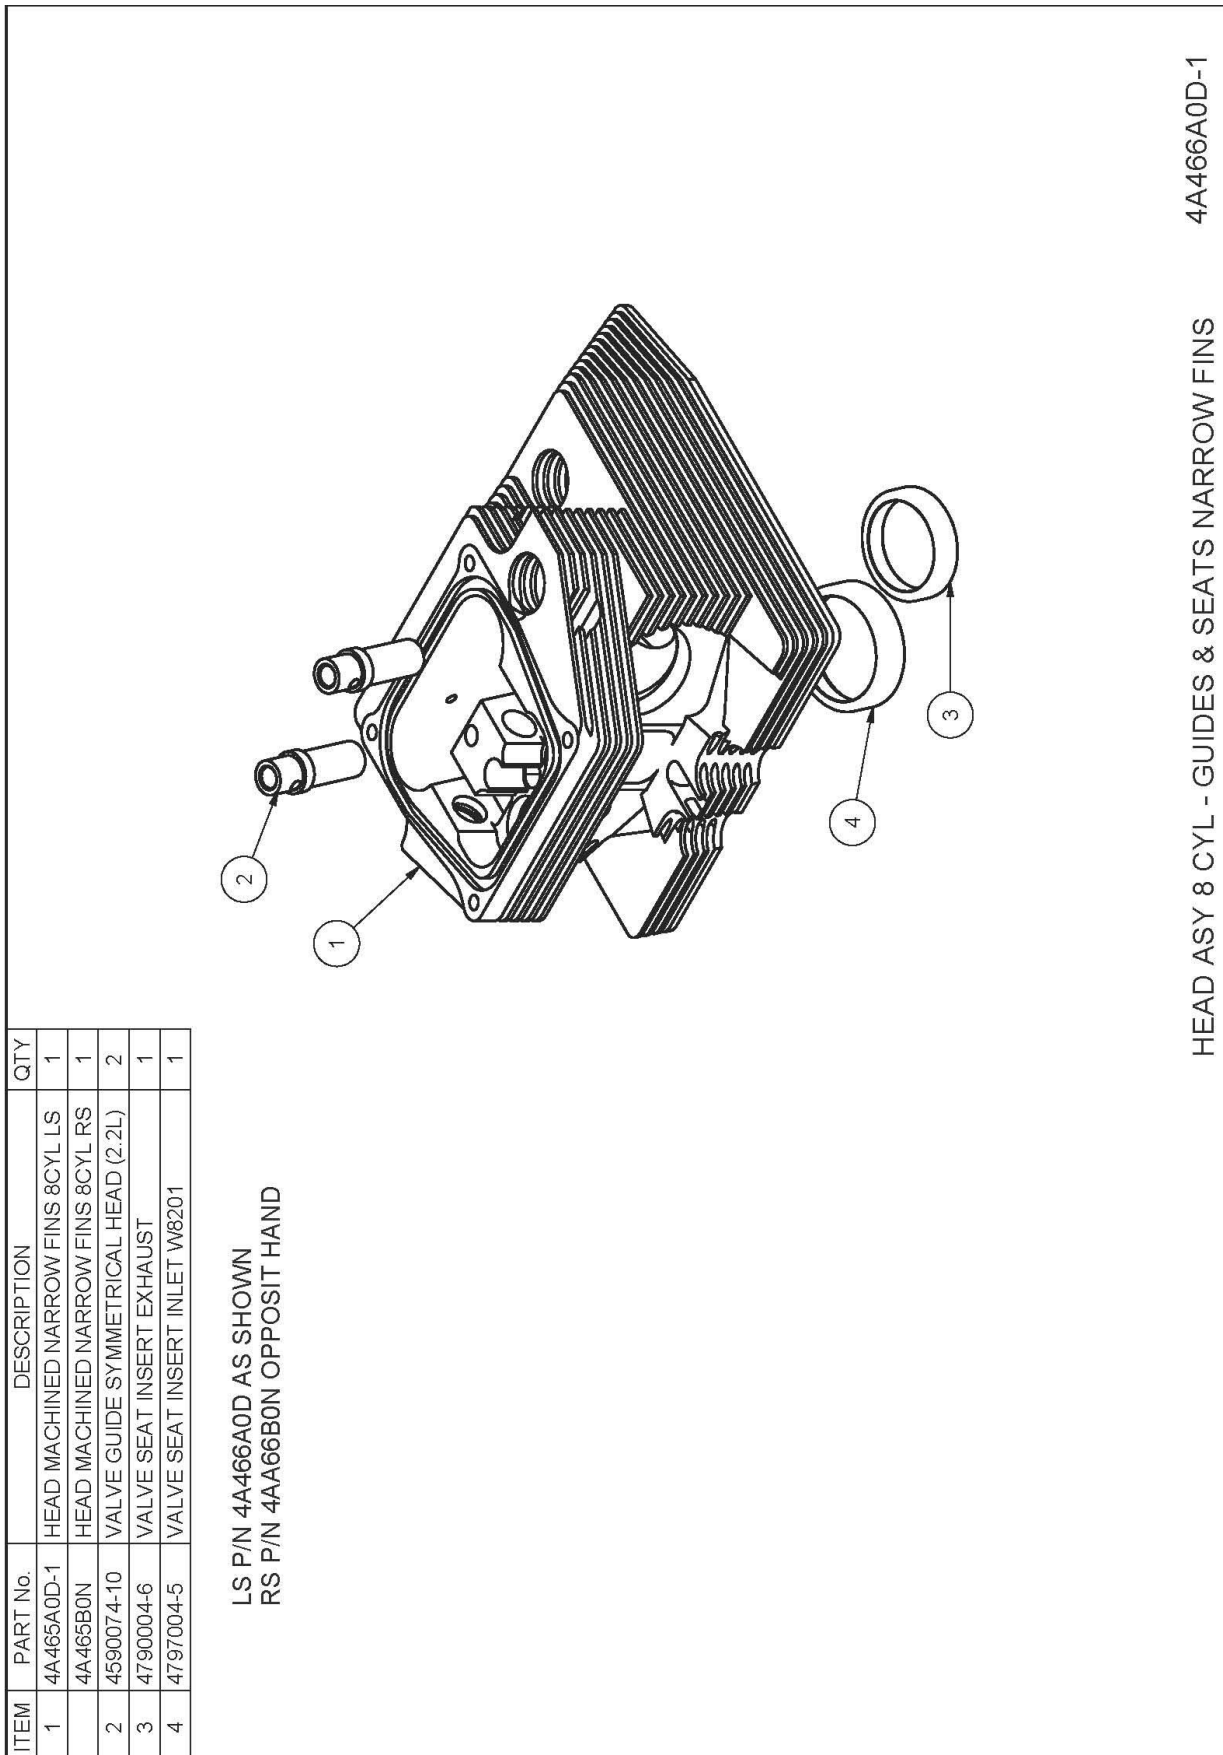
Head, Valve Guides & Seats Assembly Narrow Fins S/N 34 on
